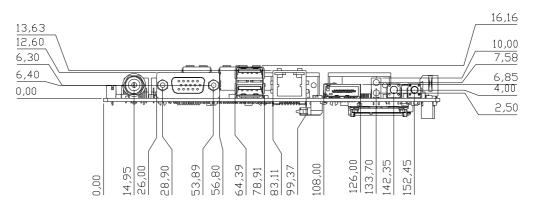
MIOe-DB2000 Mechanical Drawing (Front I/O, with optional DC Jack)
